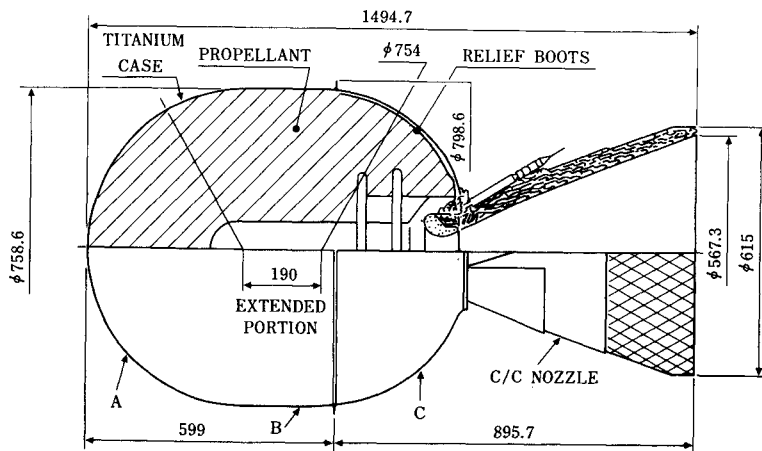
Shape and dimensions of the H-I apogee motor and the places where reflectograms in Fig. 7 were taken.
